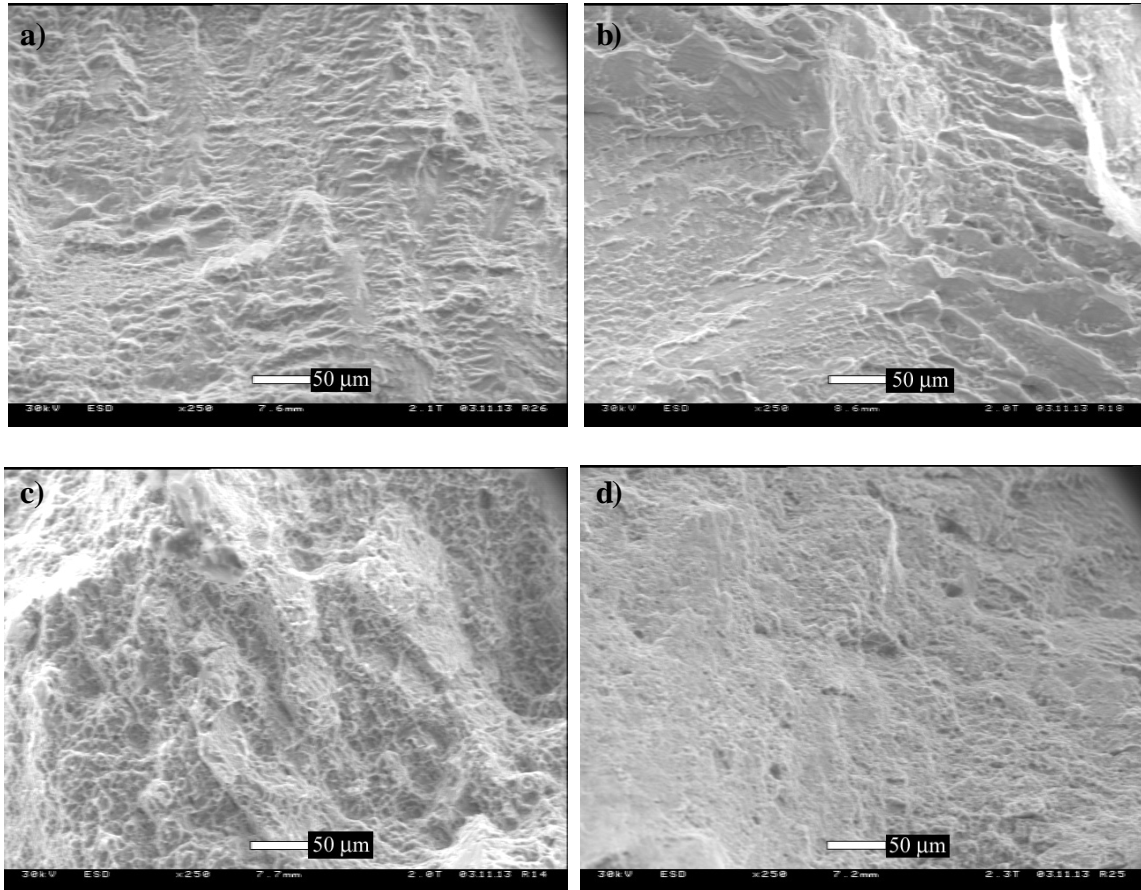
Fracture surfaces of tensile specimens, 250x. (a) Base metal, (b) matching filler metal weld, (c) modified 50 ppm Y filler metal weld, and (d) modified 200 ppm Y metal.
